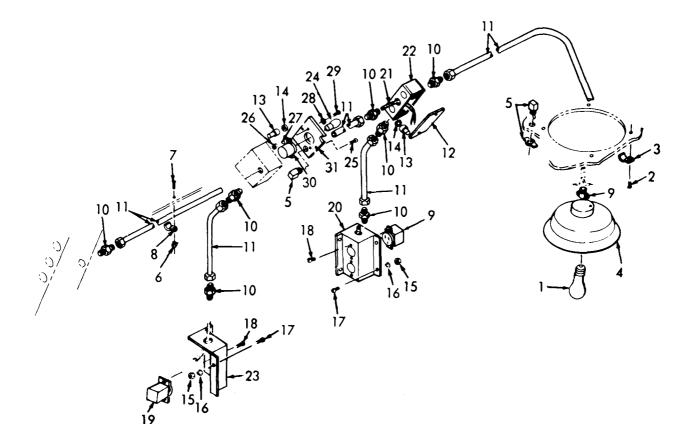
Rear Wiring to Floodlight, Removal and Installation.
